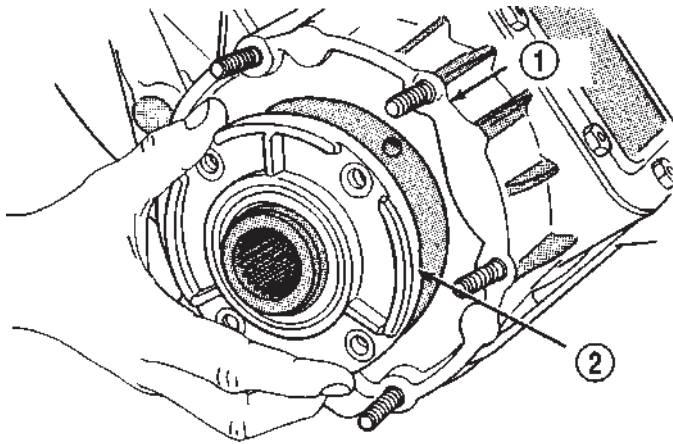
Aligning Retainer Oil Channel and Case Feed Holes
